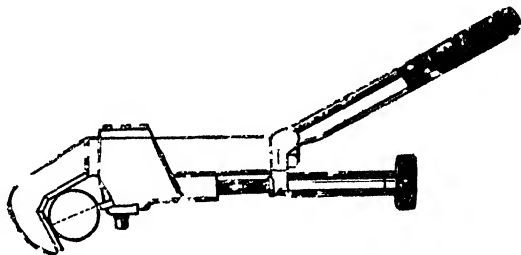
The Ammco Crank Pin Truing Tool. This has two guide planes at right angles and an adjustable cutter, operated by the lower screw.
